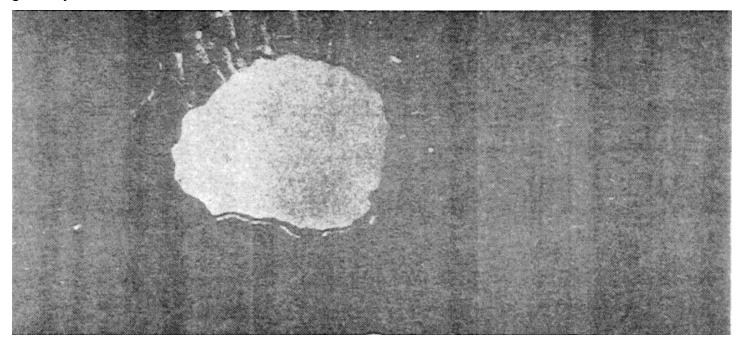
Cracked Caused by Hole Burnt in Wheel Plate.
